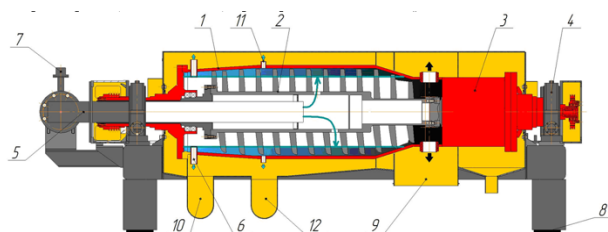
Schematic diagram of a centrifuge with a cylindrical-biconical rotor: 1 – rotor; 2 – screw; 3 – planetary gear; 4 – rotor support; 5 – feed pipe; 6 – concentrate tubes; 7 – electric drive crane; 8 – retractable support with shock absorber; 9 – sediment shaft; 10 – concentrate shaft; 11 – thickened product tubes (or plug in dual-product mode); 12 – thickened product or wash liquid shaft
